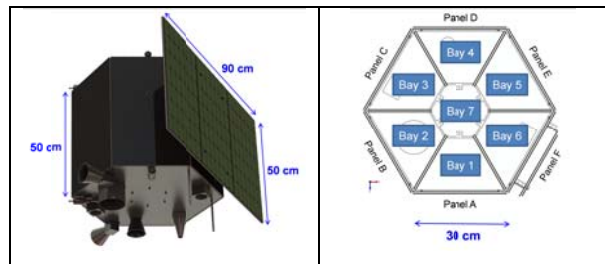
The CAD drawing of the exterior of DebrisSat (left) and the top-view layout of the structure (right).
